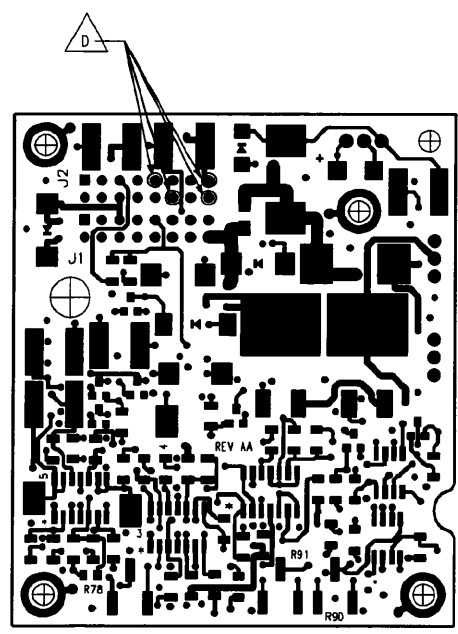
SERVO BOARD ASSEMBLY DWG 300-09366-0100 (Dwg No 300-09366-0100, Rev A, Sheet 1 of 1)
